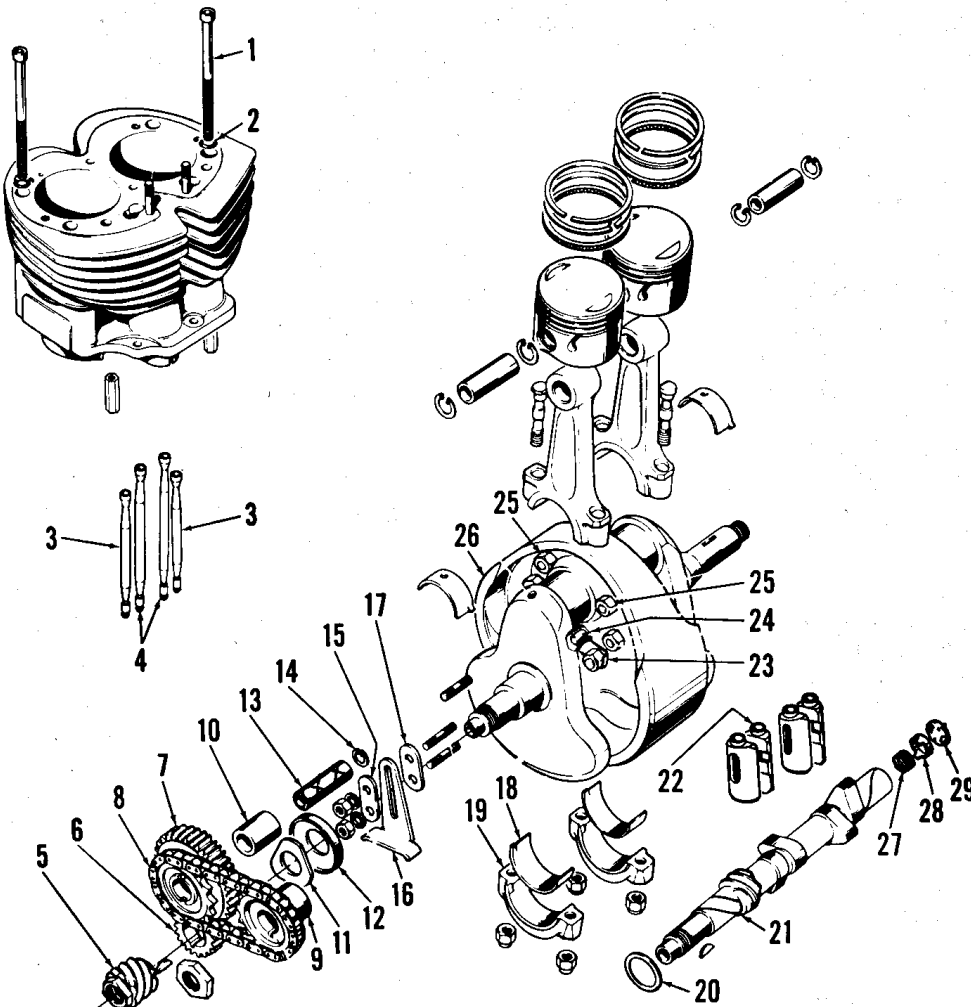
Exploded view of typical engine assembly. Cylinder thru bolts (1) are only used on 850cc engines. Crankcase breather components (27, 28 & 29) are used on models prior to 1972.
